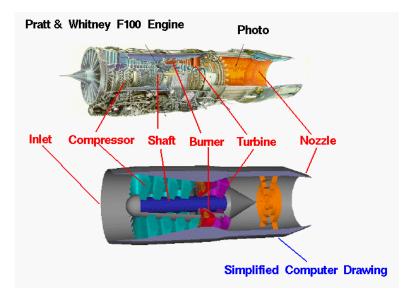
Schematics showing different parts in a typical gas turbine engine [Ref. 4].
